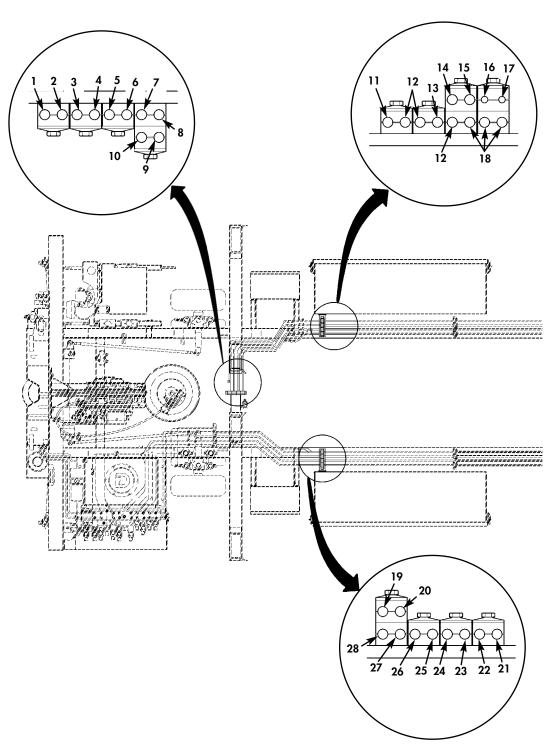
Pallet Hydraulic Tubes (Sheet 1 of 3).
